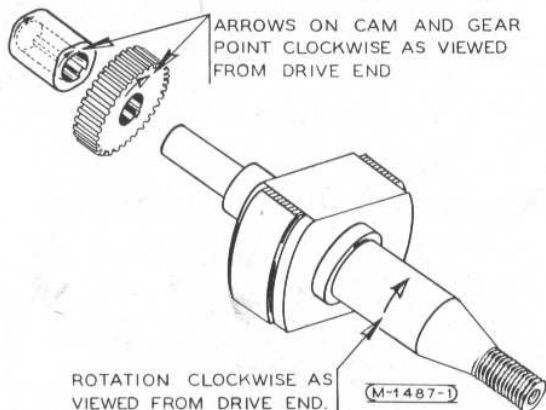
A. Correct Assembly of Cam and Gear to Magnet—Clockwise
